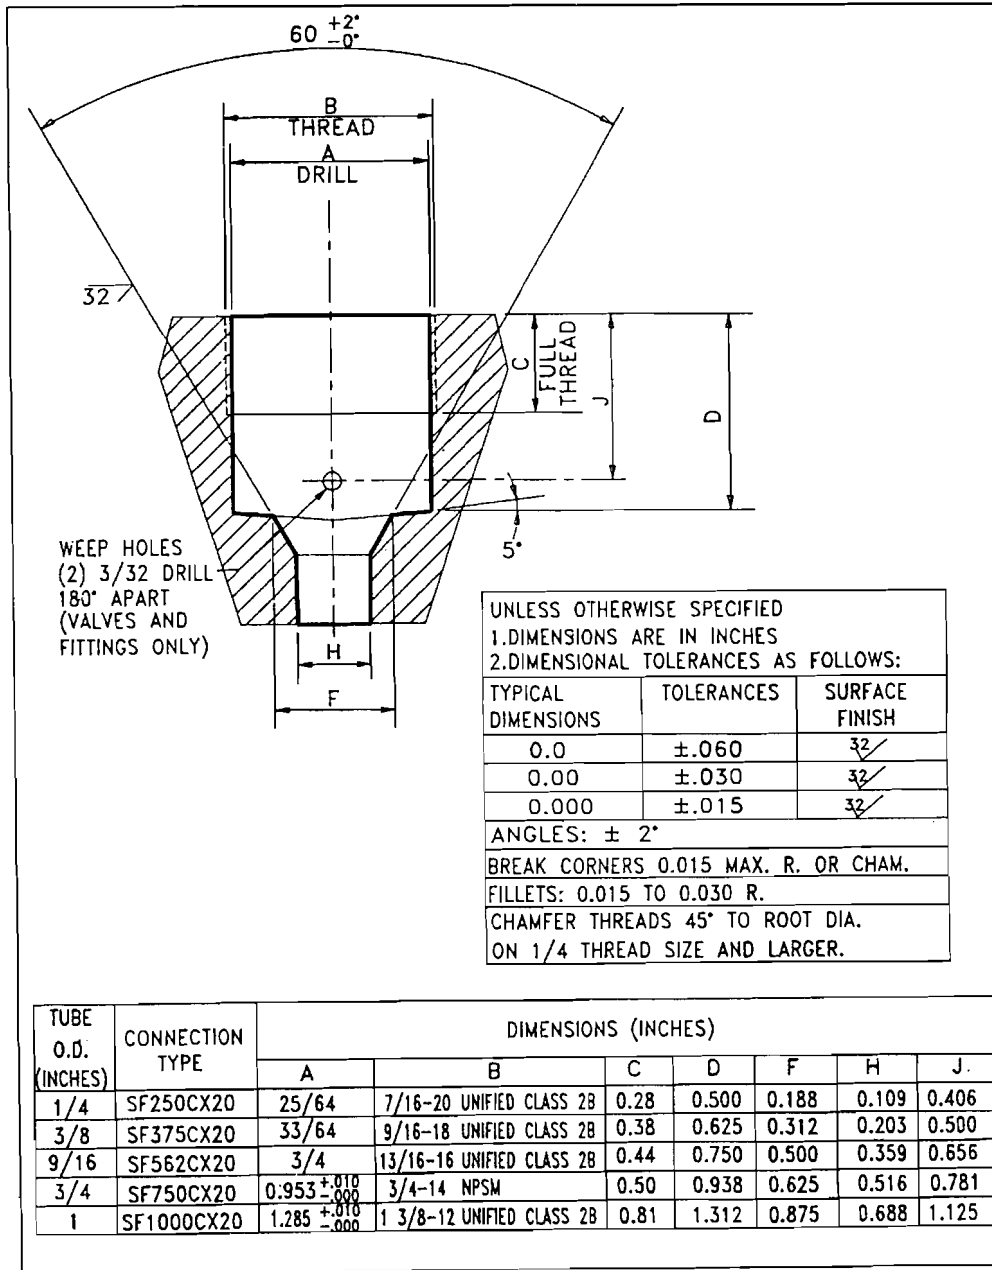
20,000 psi Rated Coned & Threaded Tube Fitting Female End Connection Details
